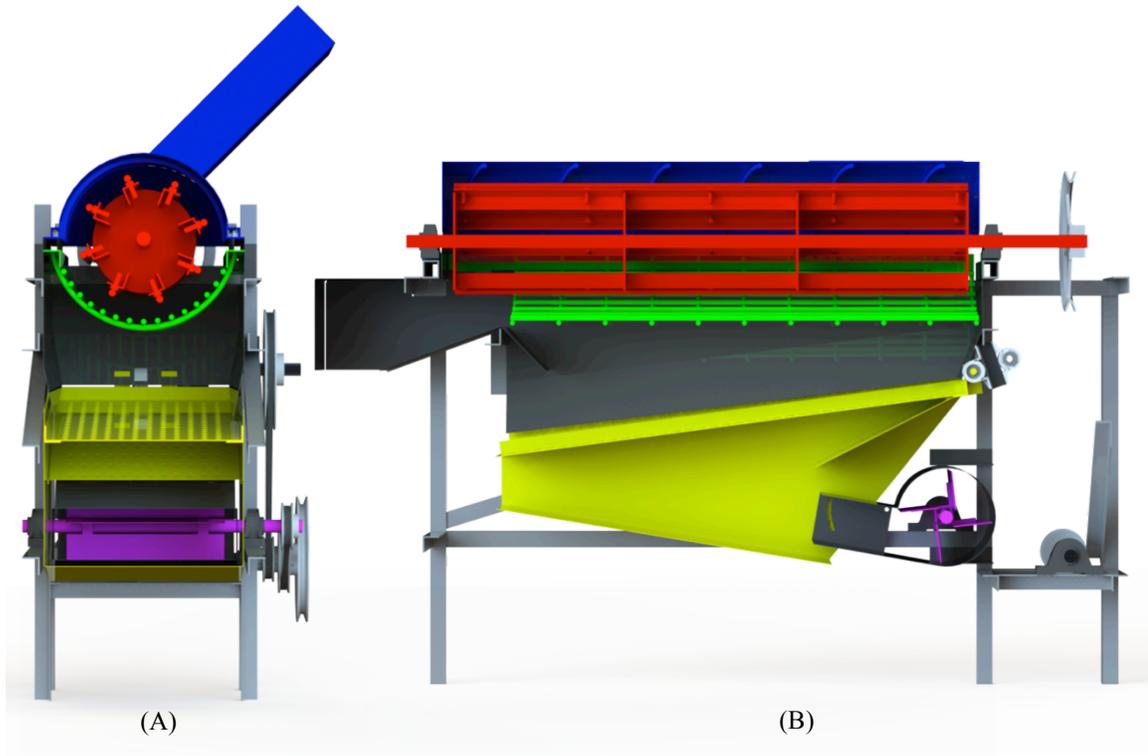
A rendering of (A) a cross-sectional view from the end and (B) a cross-sectional view of the side of the final thresher design. Source: Author.
